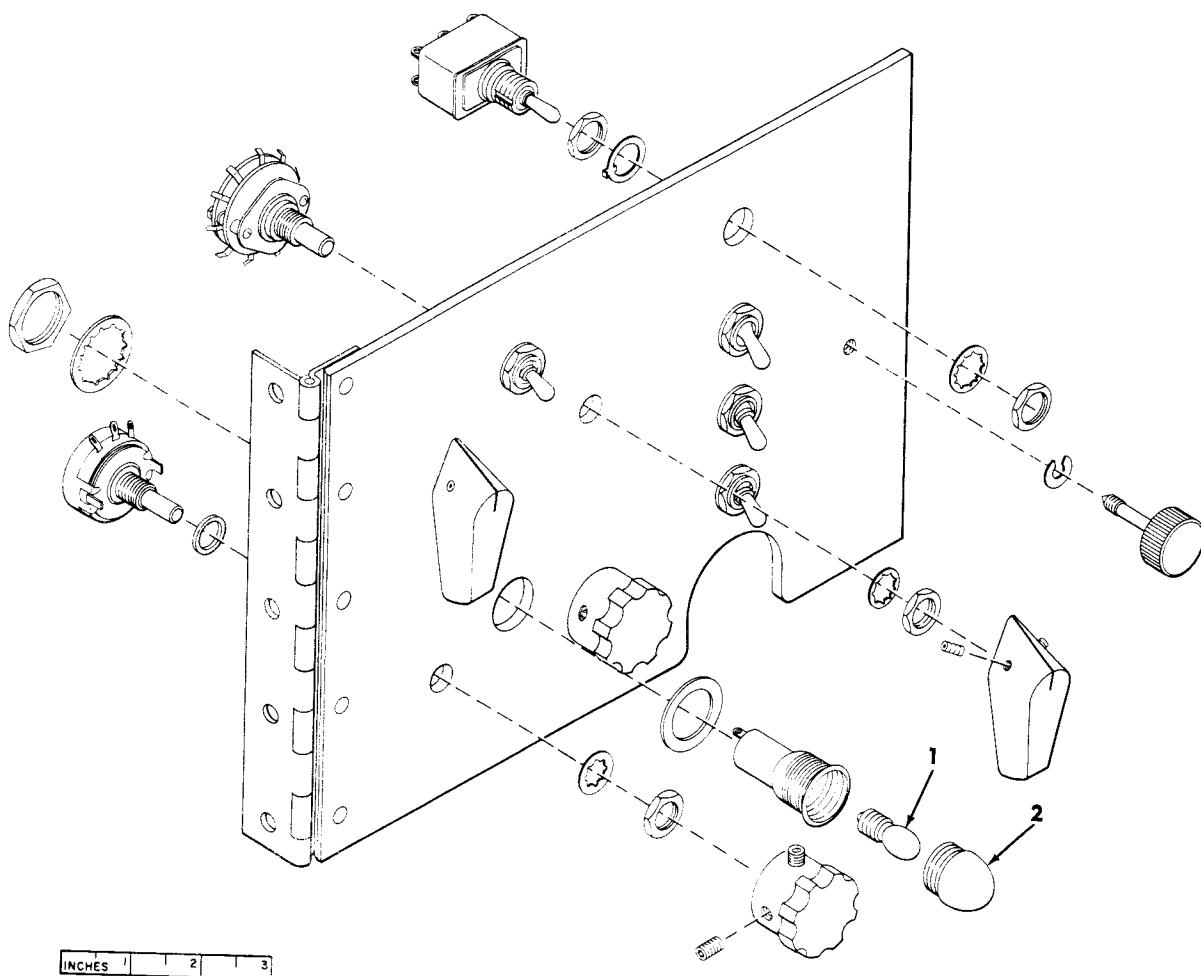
Coder set, radar KY-229/MPA (8512239) – partial exploded view
